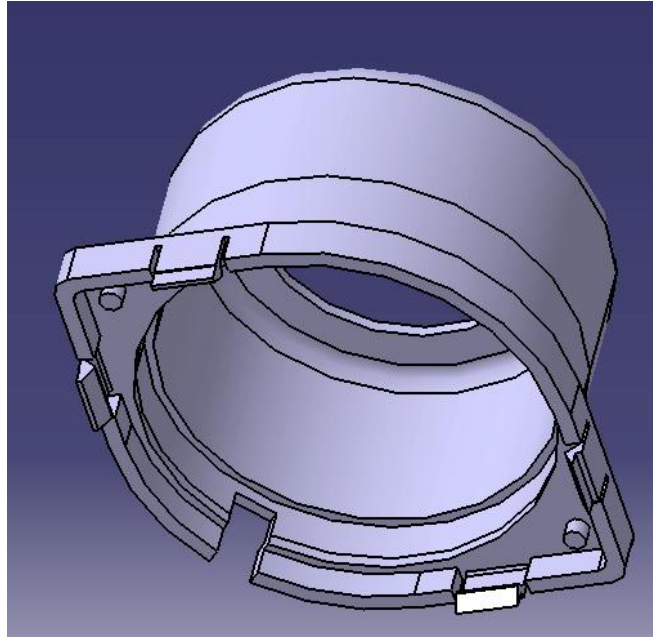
Three dimensional model of the front casing of the auditory alarm unit.
